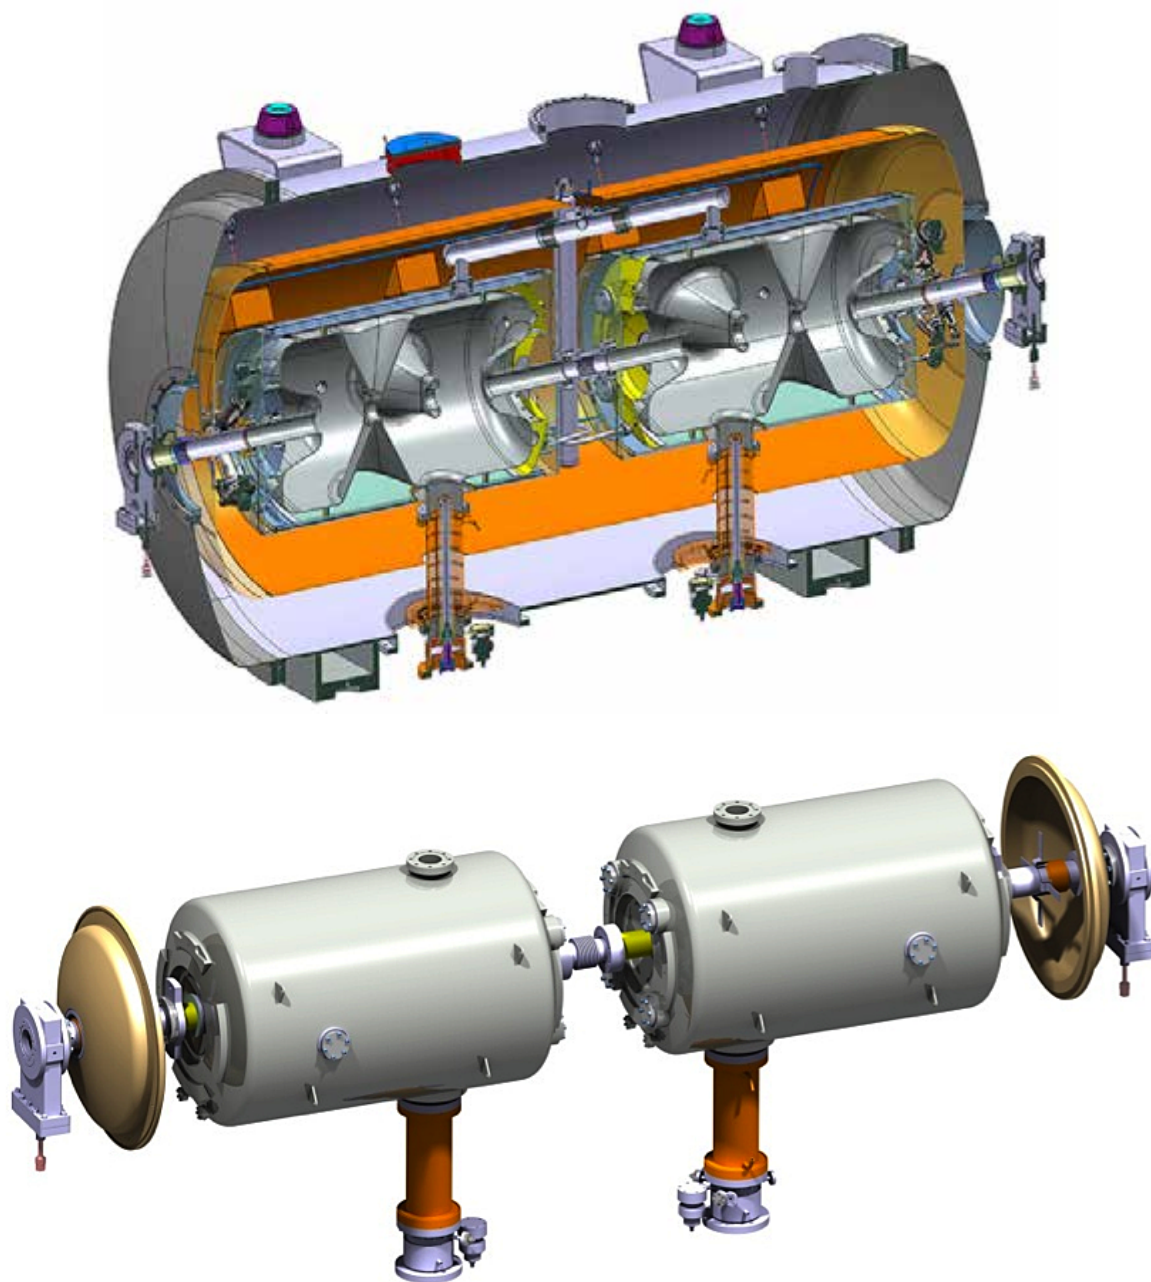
A spoke cryomodule string, composed of two spoke cavities. Top: Spoke cryomodule solid model. Bottom: Spoke cavity string assembly.
